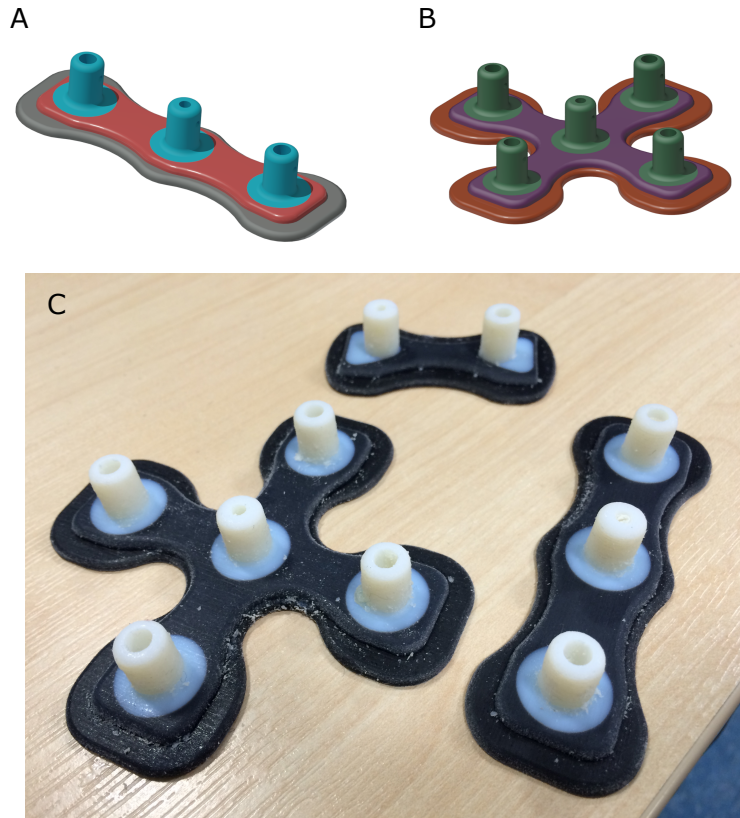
(A) 3D CAD of the two-channel optode holder; (B) 3D CAD of the four-channel optode holder; (C) 3D printed optode holders of the designs shown in (A), (B) and Figure 4.20.
